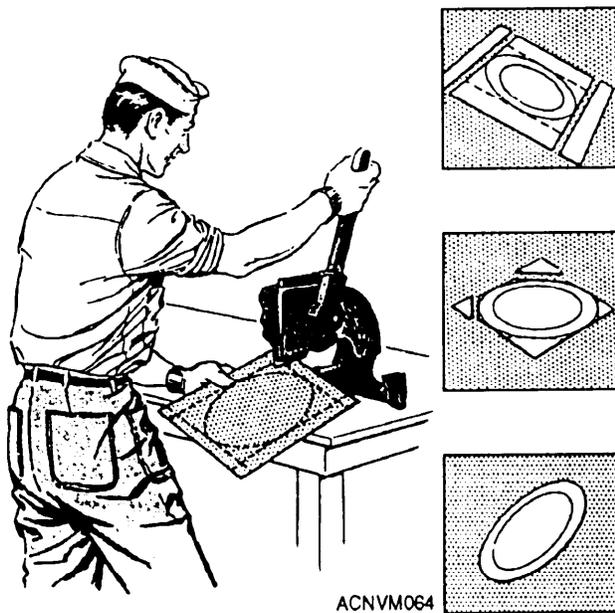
Cutting outside of a circle with slitting or bench shear.
